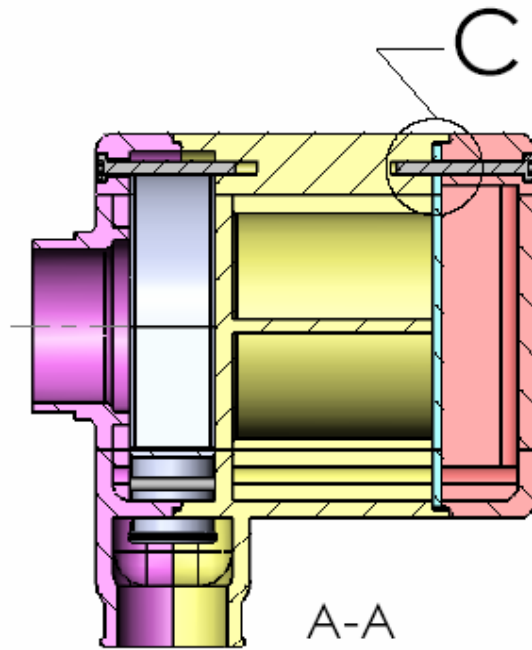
Cross-sectional drawing of the blower main housing and Battery Compartment
